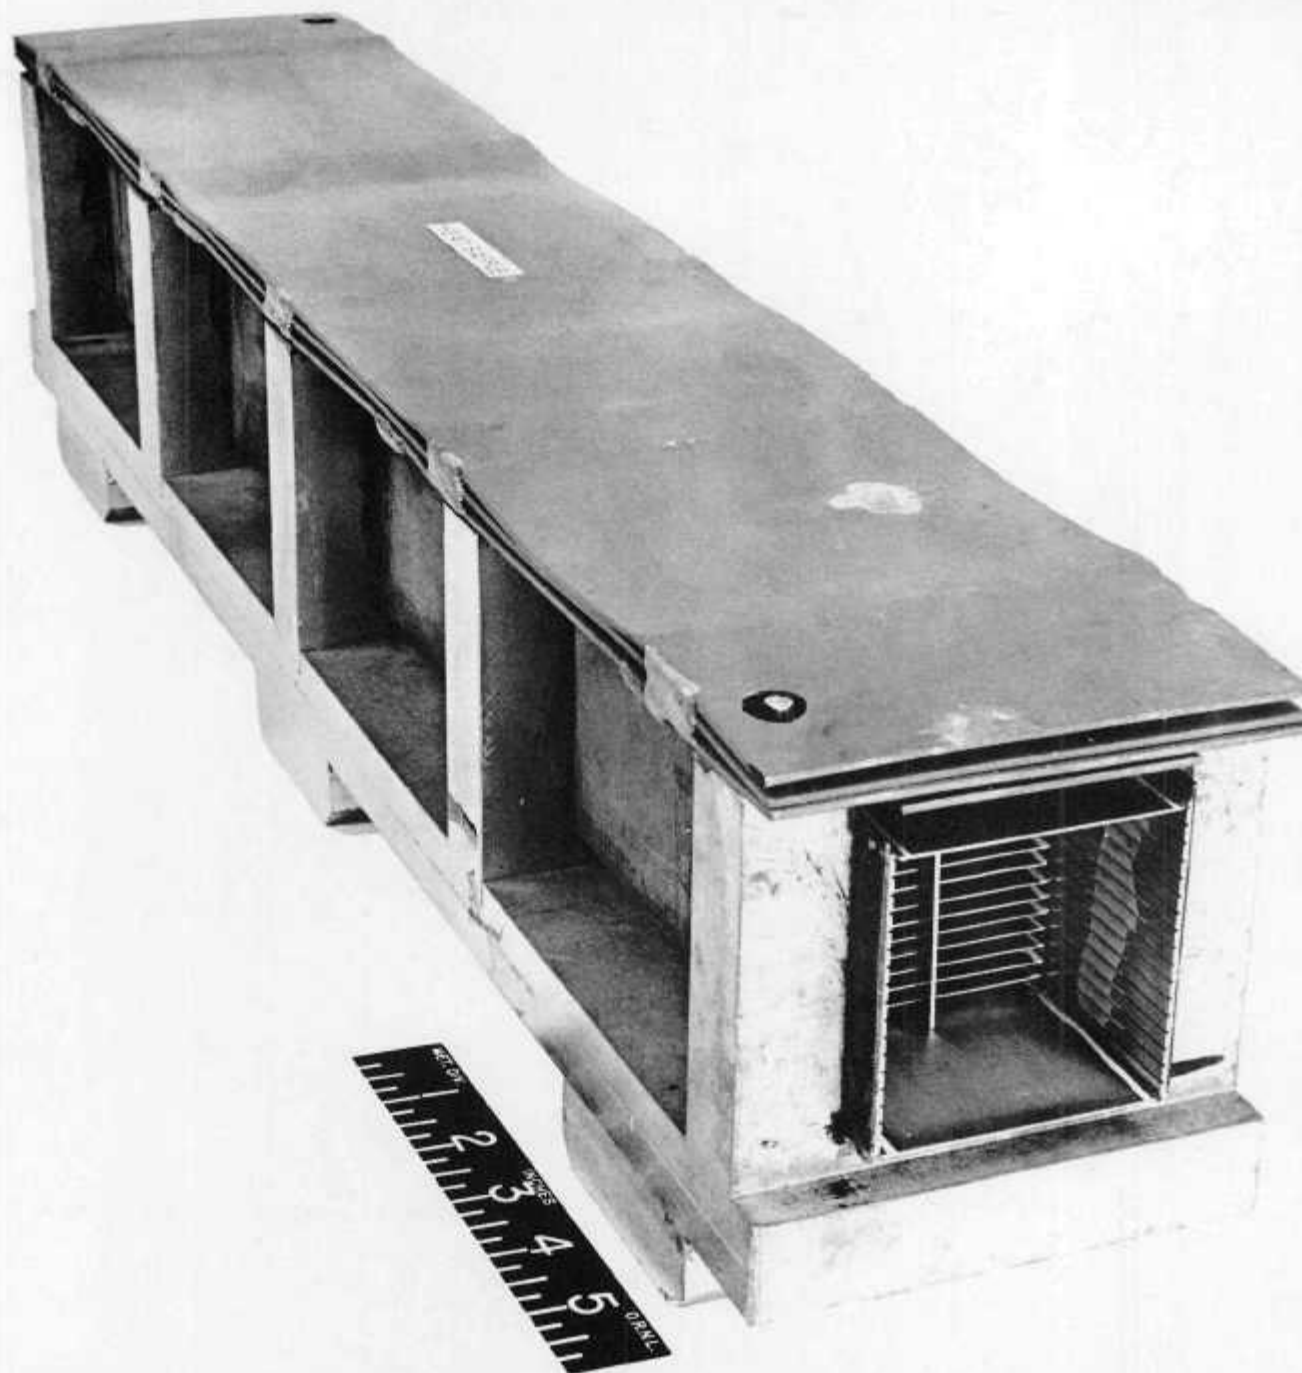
(Y-25957) APPR Fuel Assembly Ready for Brazing.
